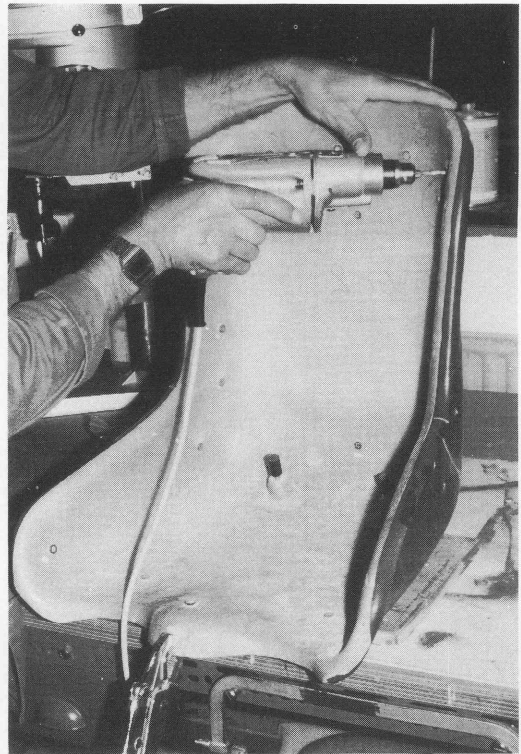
Use of the permanent pattern, or die, for drilling of screw holes, in a standardized array, in the seatshell for mounting of the inner sections.
